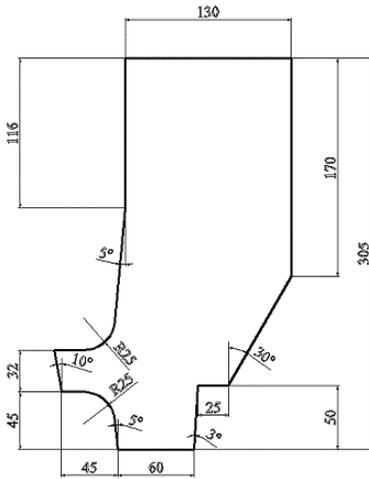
Geometry of the casting with raiser (size in millimeters)
